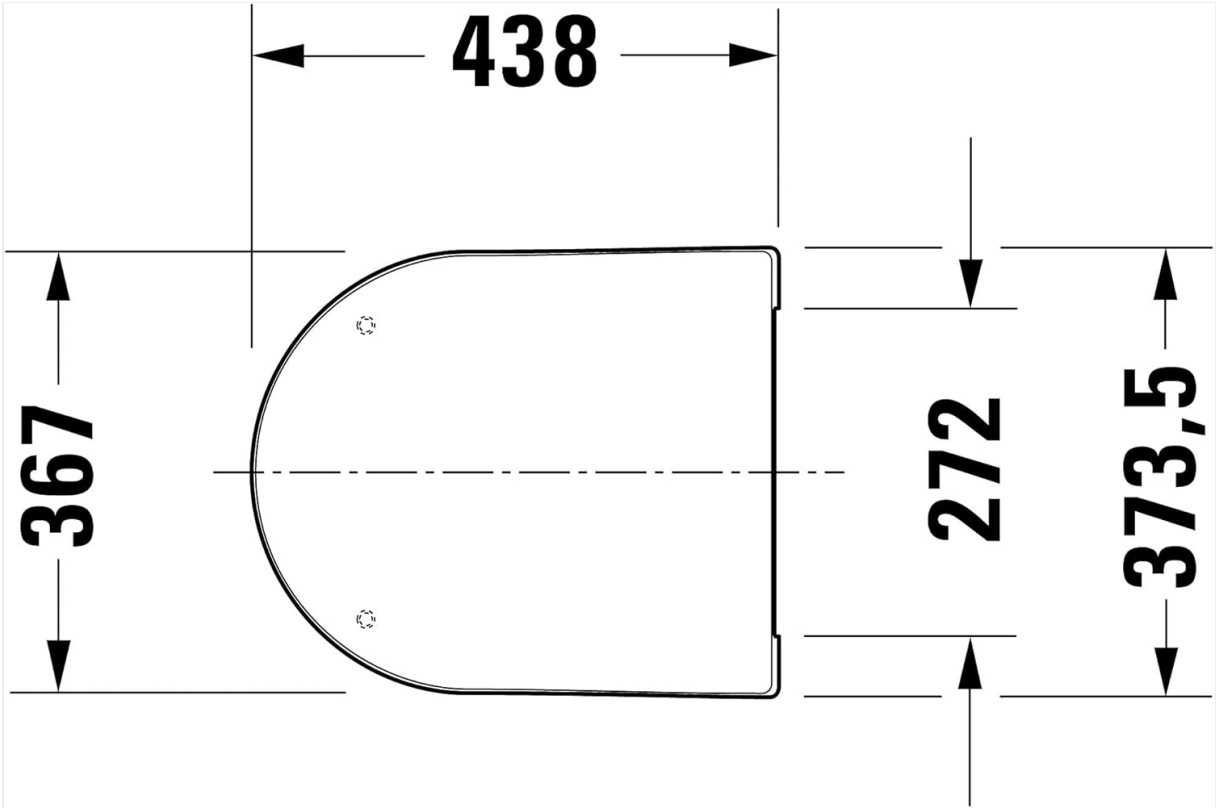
Technical drawing illustrating the dimensions of the toilet seat (measurements in millimeters).
